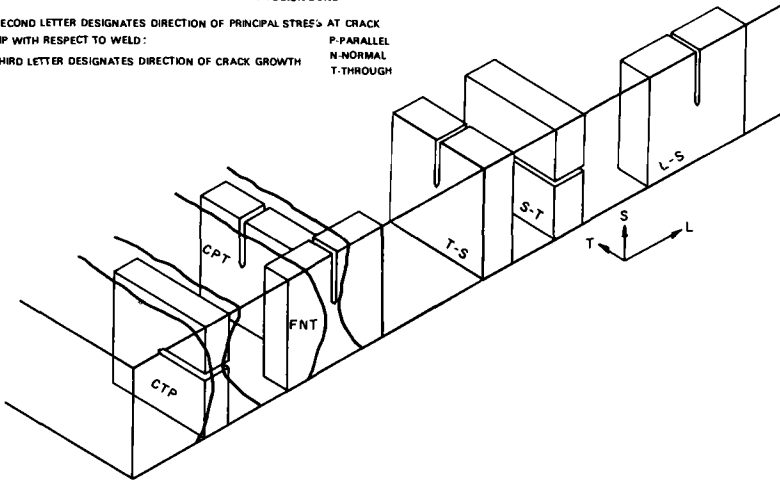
Compact tension specimens in plain and welded plate.
